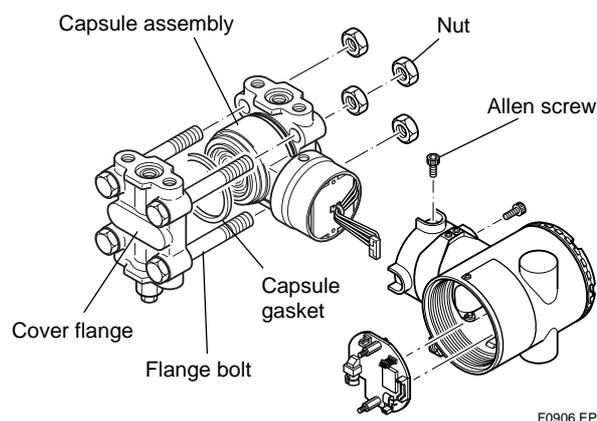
Removing and Mounting the Pressure-detector Section
